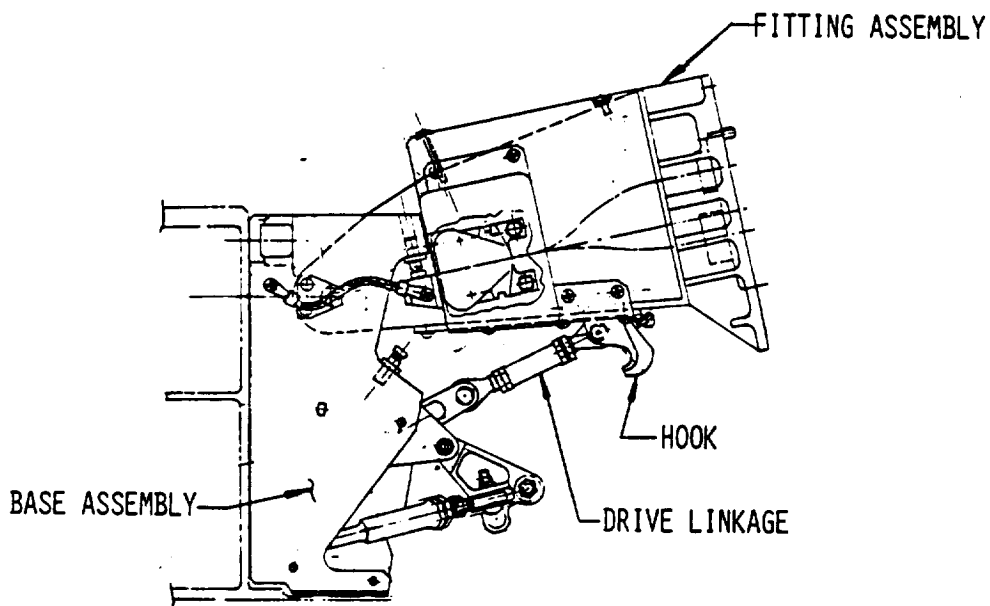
Manipulator Positioning Mechanism Shoulder Assembly
